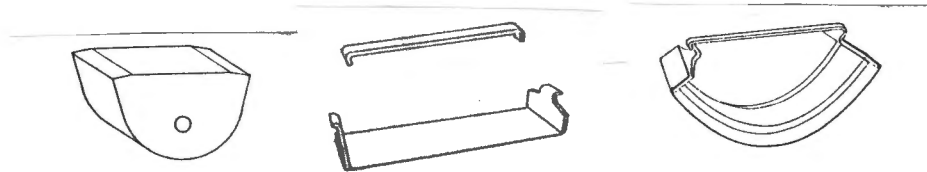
Bending equipment: mould, strap (bending plate), clamp and bended workpiece
